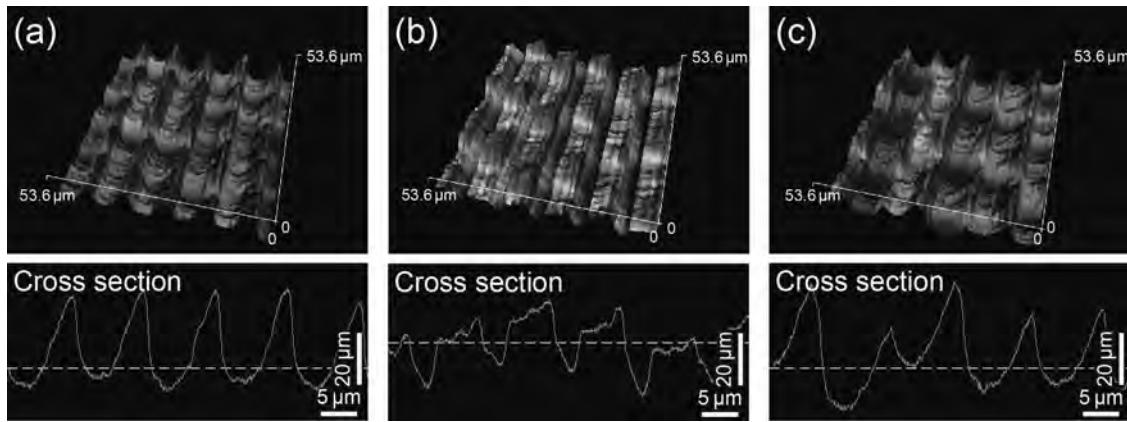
Surface topography of the aluminum surface after machining using (a) nonirradiated tool, (b) FIB irradiated tool and (c) FIB irradiated tool with heat treatment, measured using white light interferometer.
